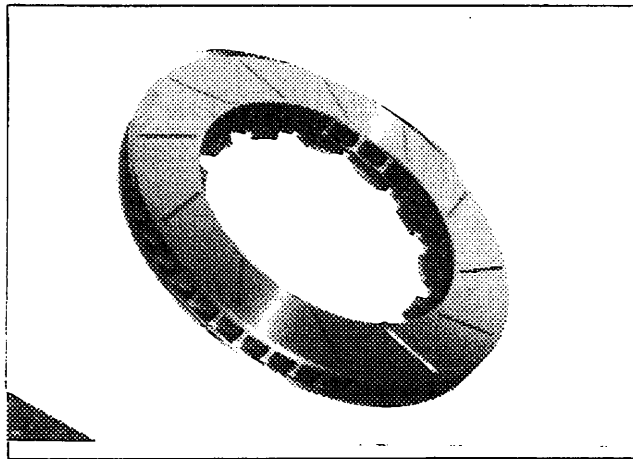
FRONT AND/OR REAR BRAKE DISC
